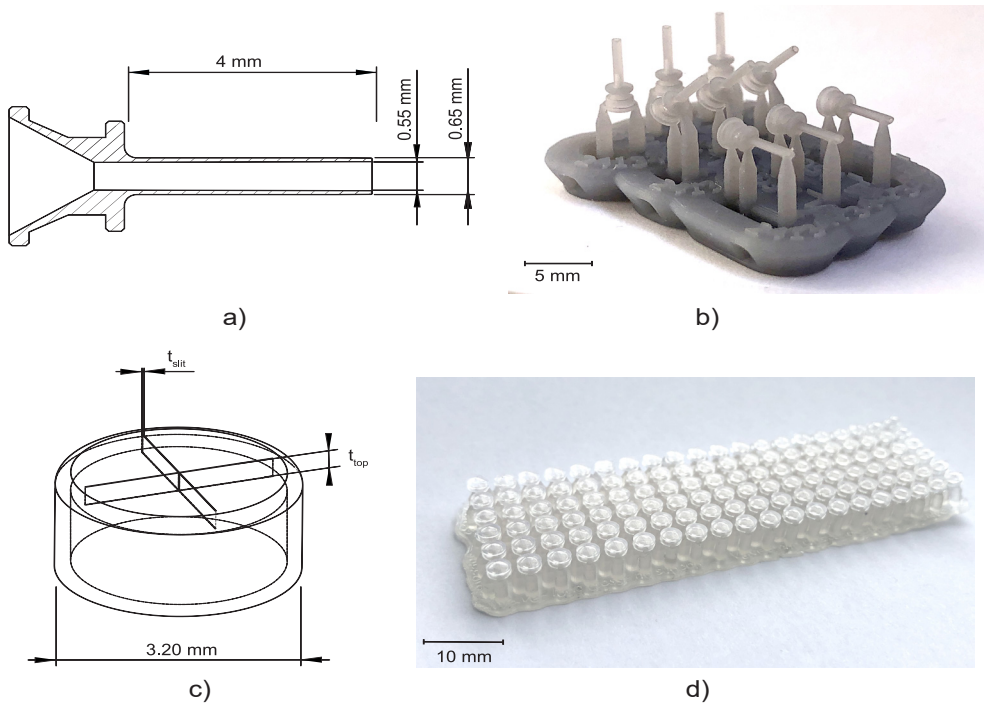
Overview of the 3D printed cannulas and valves. a) Design and dimensions of the printed cannula. b) Example of the 3D printed cannulas in three different orientations, still on their support structure. c) Design and the dimensions that were tested for the valve, in which t_{slit} is the thickness of the slits, and t_{top} is the thickness of the top. d) Example of the 3D printed valves with different dimensions, still on their support structure.
